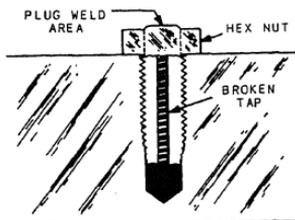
Using a plug weld to remove a broken tap.
